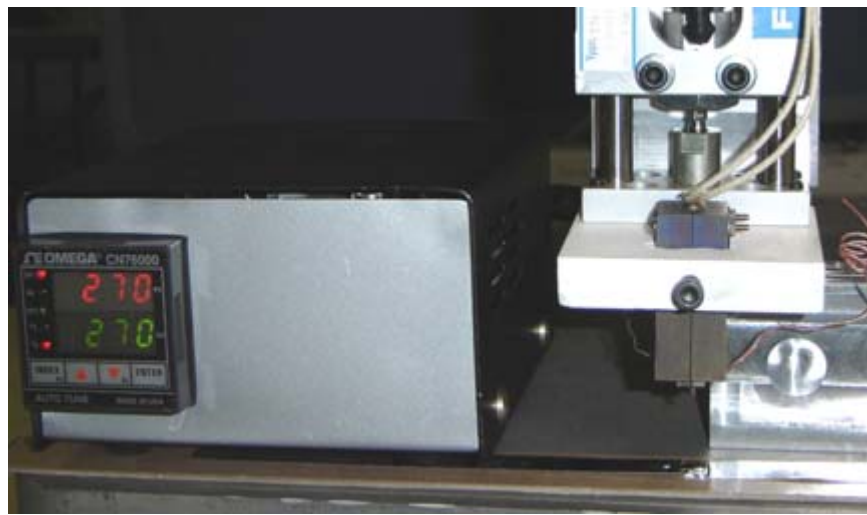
Slide-mounted solder head suspended from robot arm.
